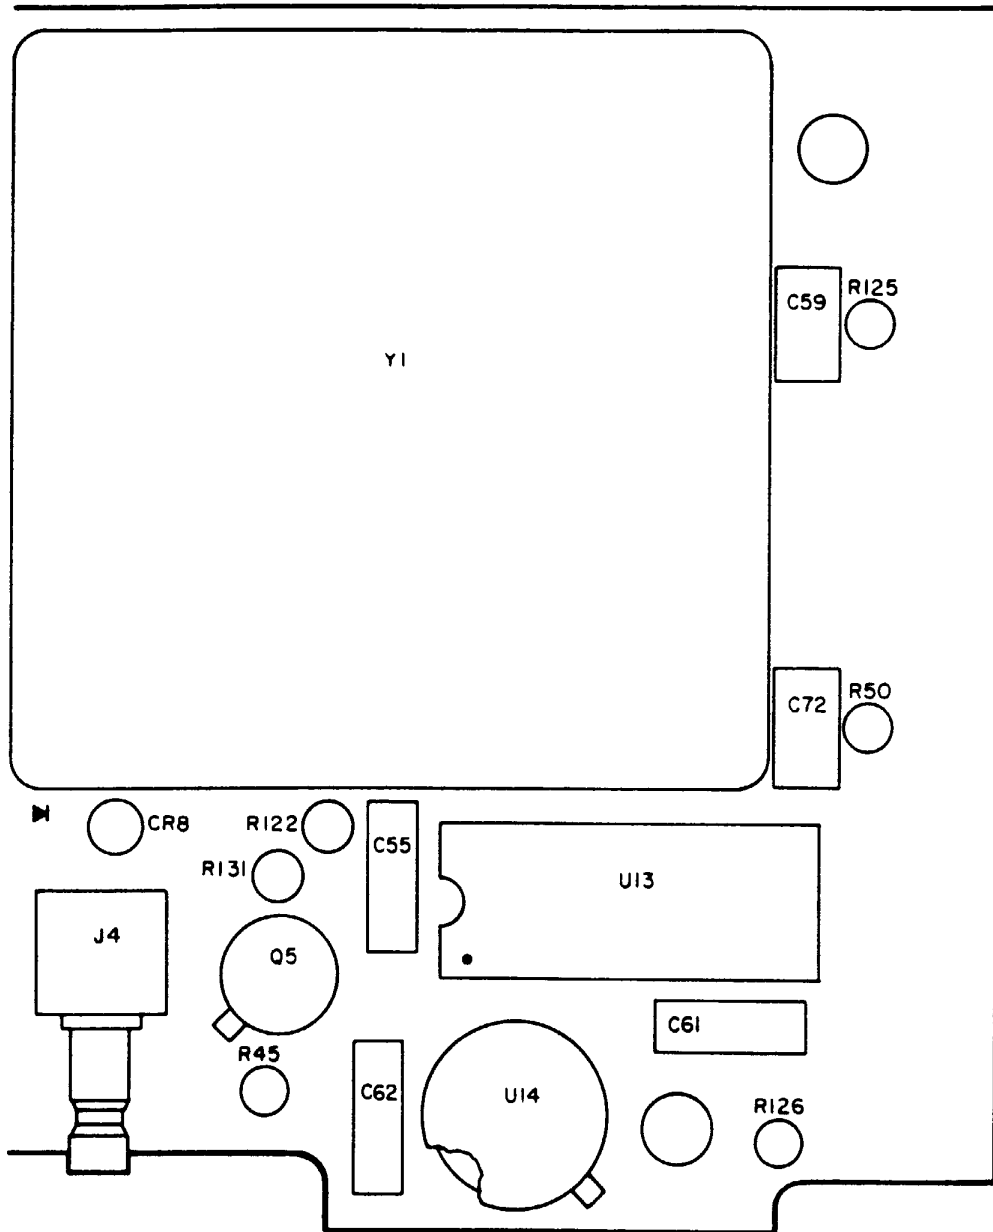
Synthesizer Assembly A1A1A6A1 Component and Test Point Location Diagram (Sheet 2 of 4)
